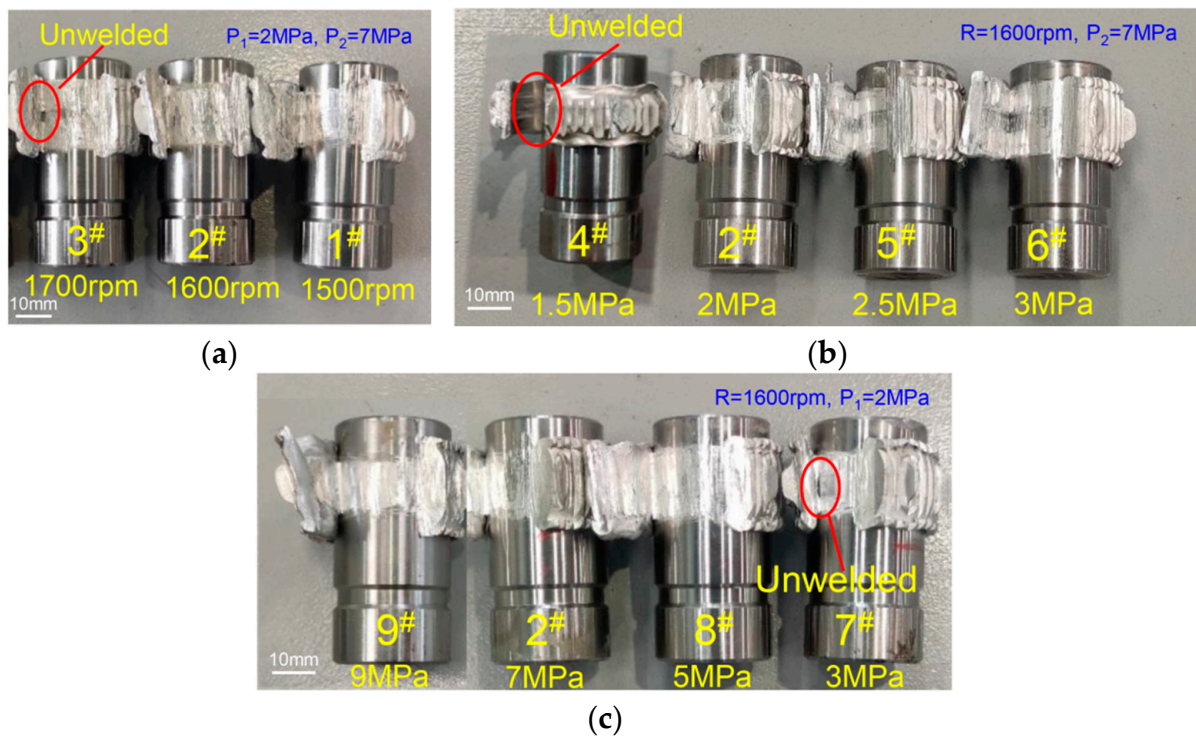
Macromorphology of aluminum/steel joint after mechanical tearing under different parameters: (a) Friction speed; (b) Friction pressure; (c) Upsetting pressure.
